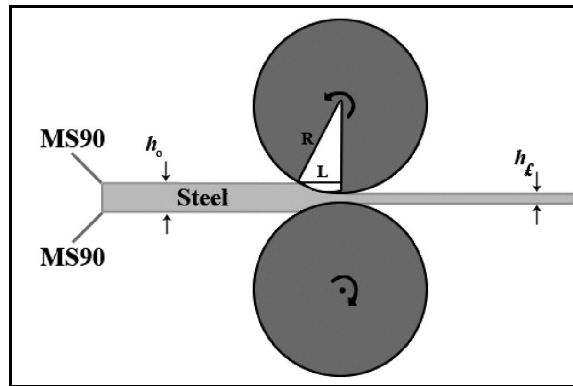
Schematic of cold roll welding of MS90/St13/MS90 pack
